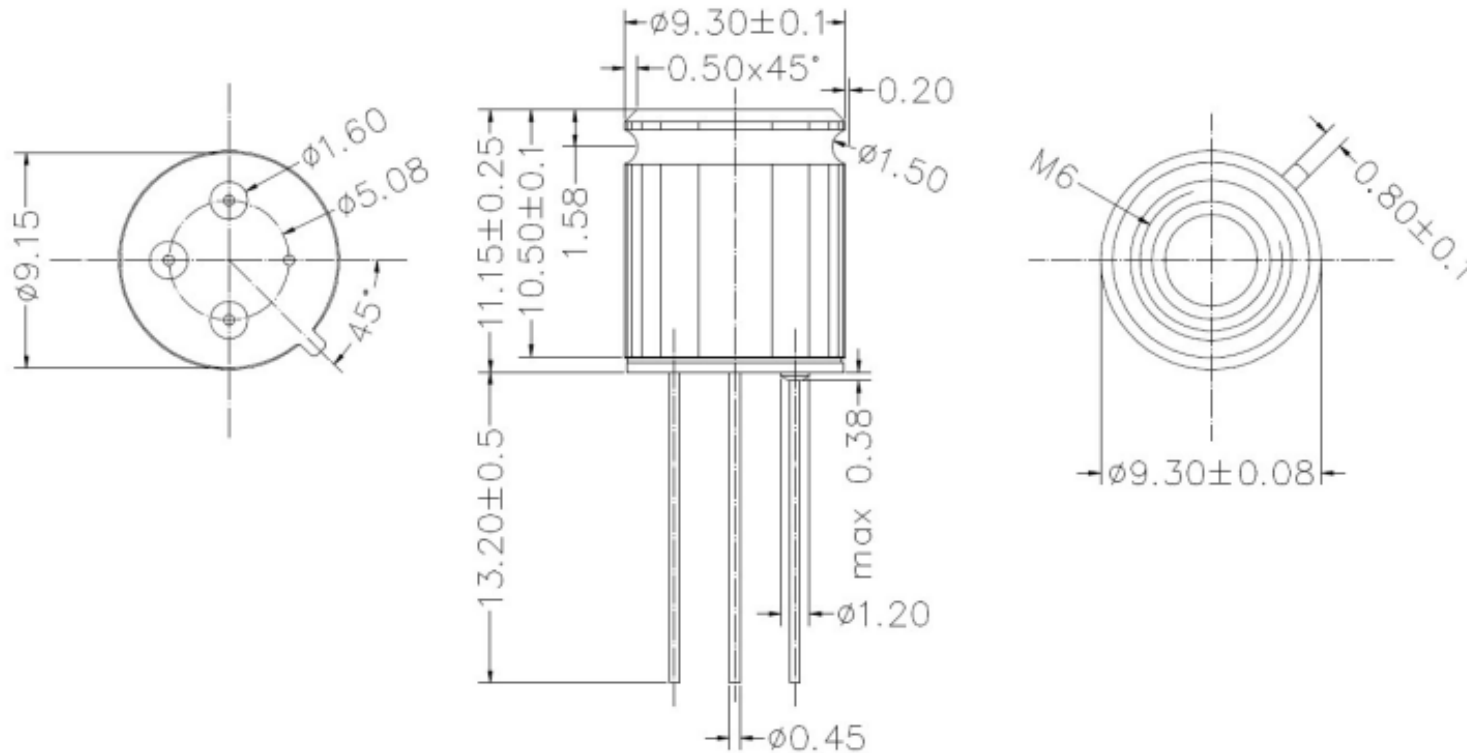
dimensional drawing of the HTPA16x4R1L3.6EA
